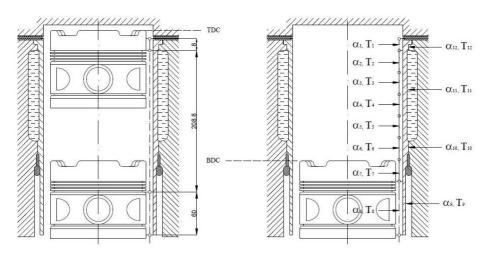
Surfaces of heat exchange of the wet cylinder liner [15]: TDC – top dead center, BDC – bottom dead center.
